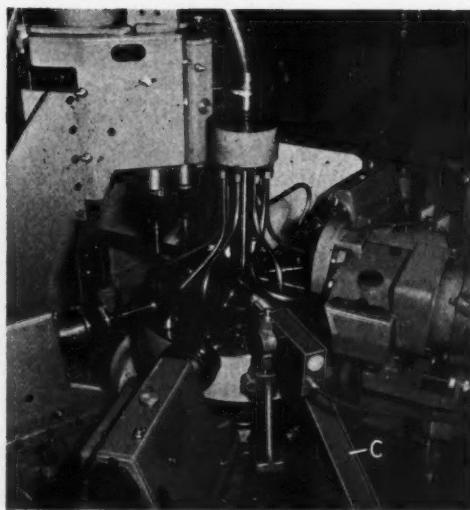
Close-up view of the Hahn & Kolb Variomatic indexing machine set up for producing a terminal component from $\frac{1}{2}$ -in. diameter brass wire
